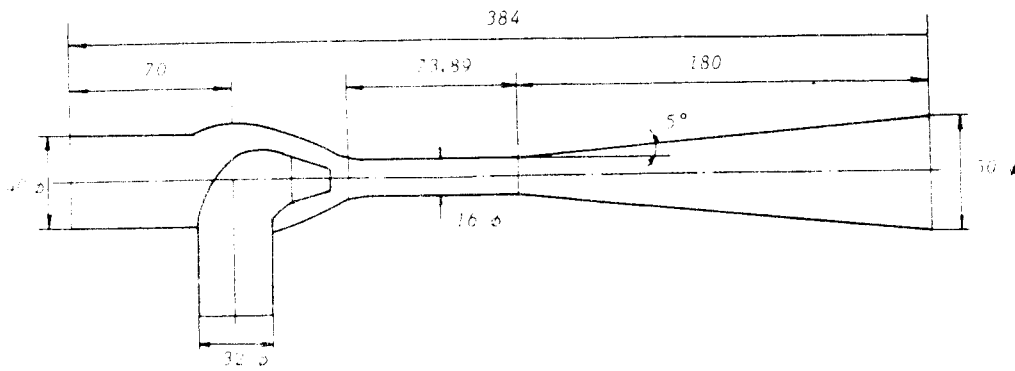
DIMENSION OF TEST LIQUID EJECTOR
